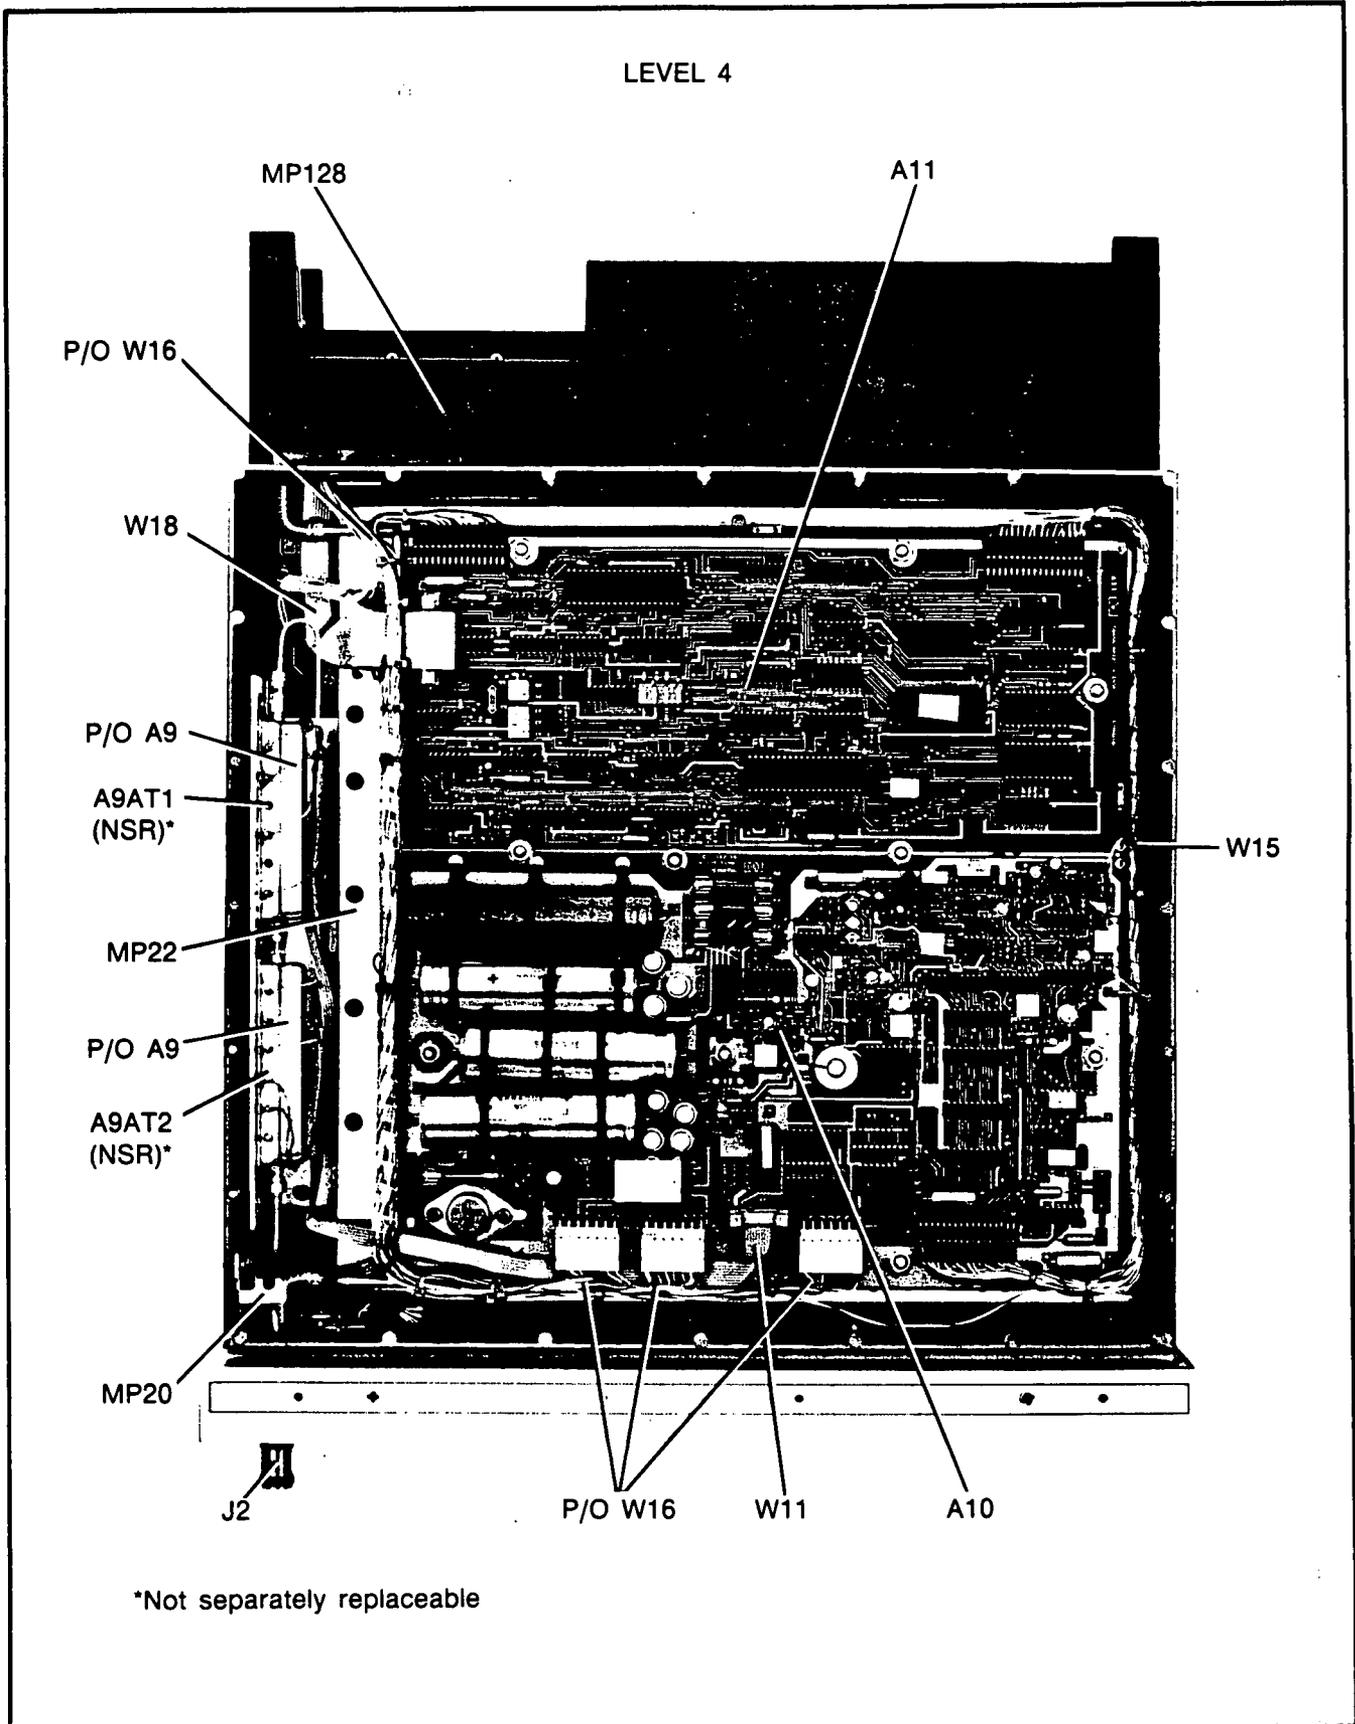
(2425A to 2509A). Bottom Internal View; Bottom Cover Removed
